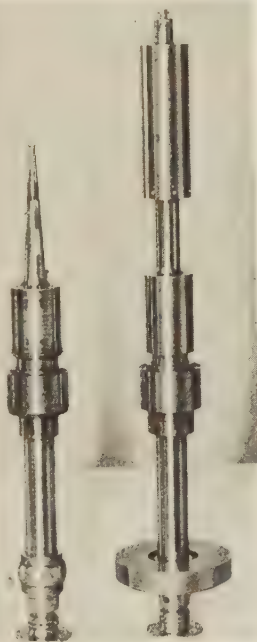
SHAFTS FOR HIGH-SPEED BEARING TESTS
